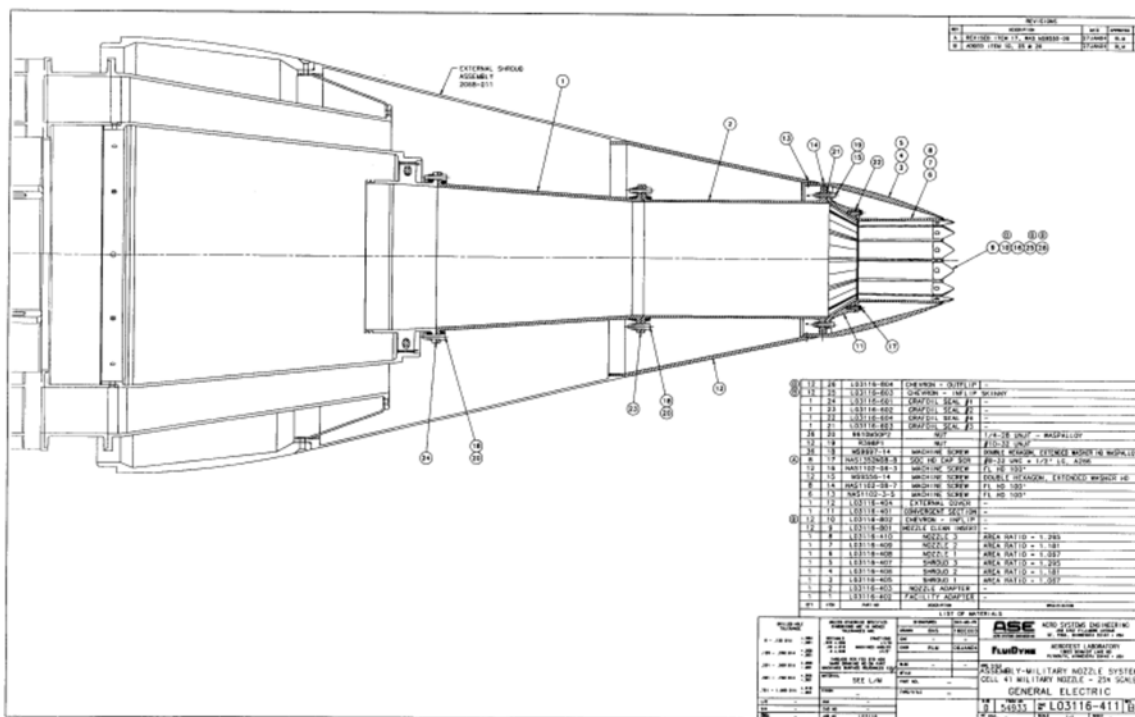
Assembly drawing containing nozzle drawings provided to SERDP team.
